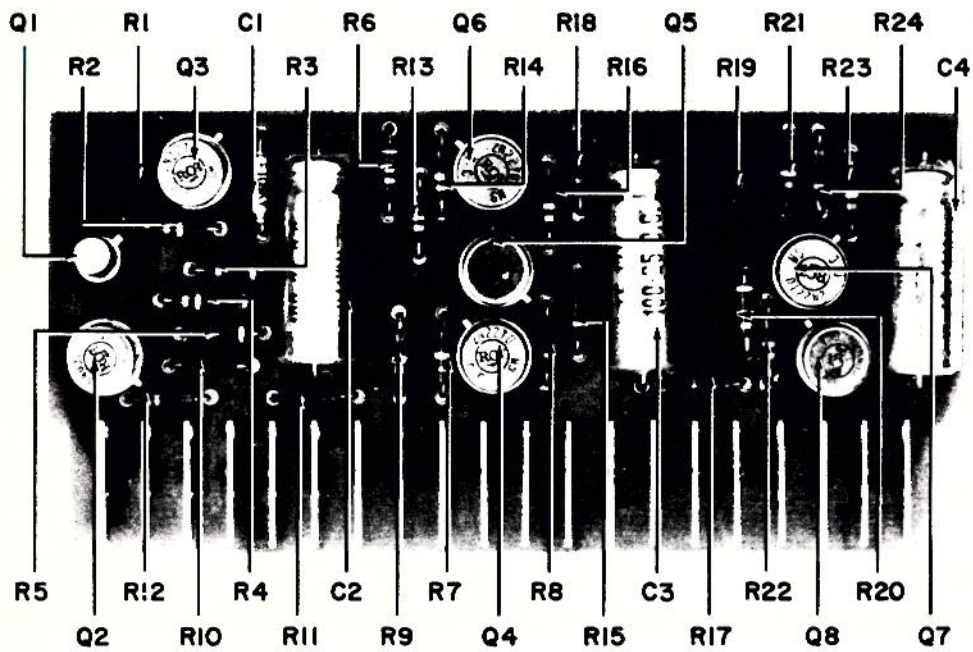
Type 8230 Sweep Generator, Component Locations
